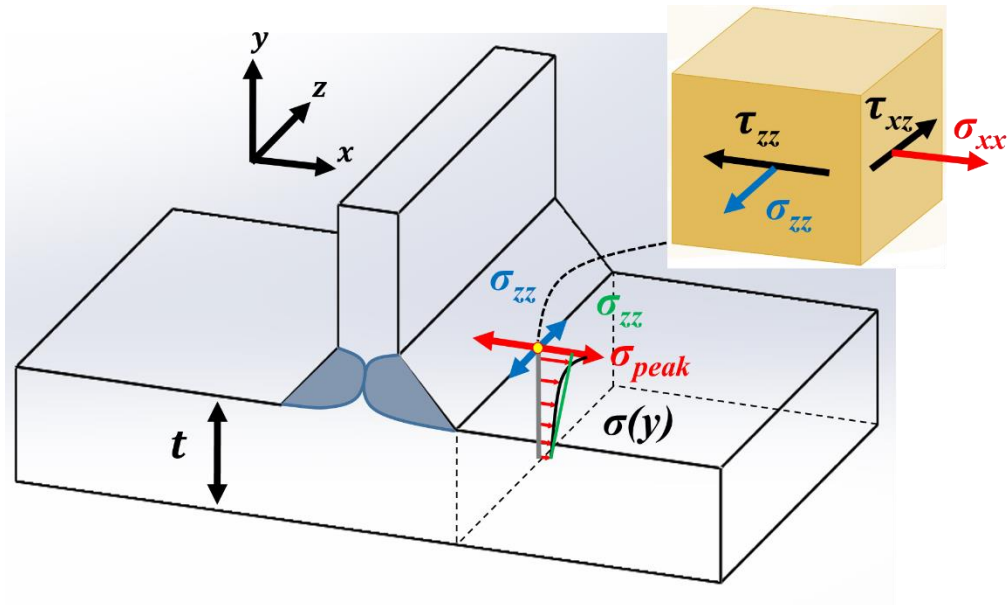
Stress state in the plate surface near the weld toe
